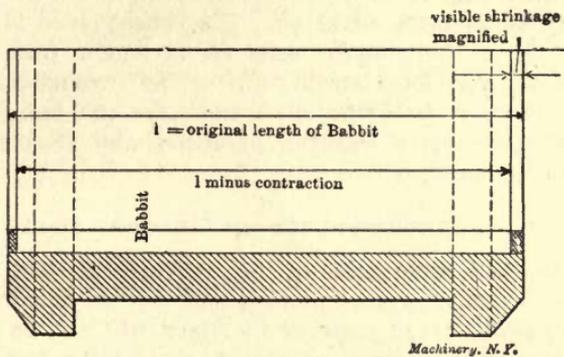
Babbitt Bearing without Dove-tailed Grooves or other Retaining Device
